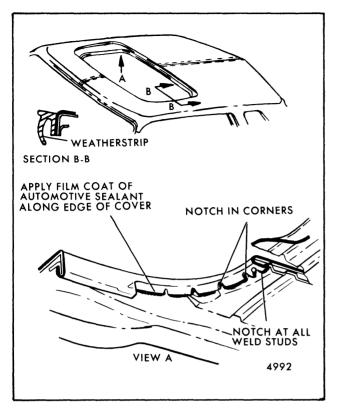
Fabric Roof Cover Installation - Sunroof Option
